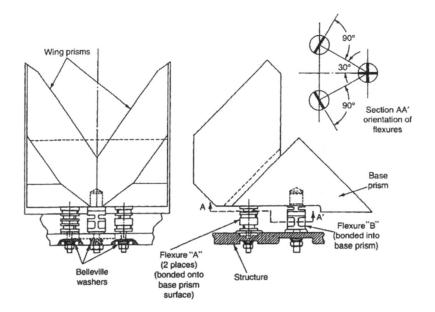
Optomechanical configuration of a large prism assembly mounted on three flexure posts. (Courtesy of ASML Lithography, Wilton, CT.)
